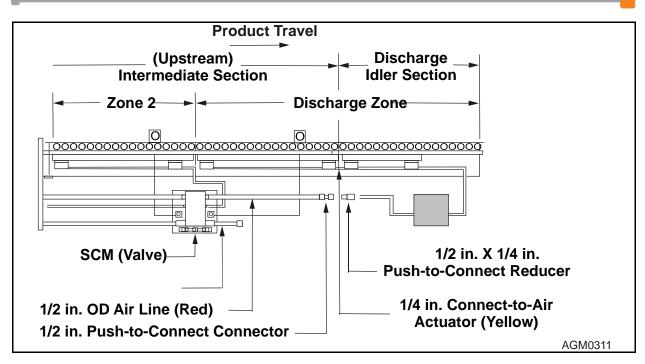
11 Operational Zone Control-Solenoid Valve Piping
